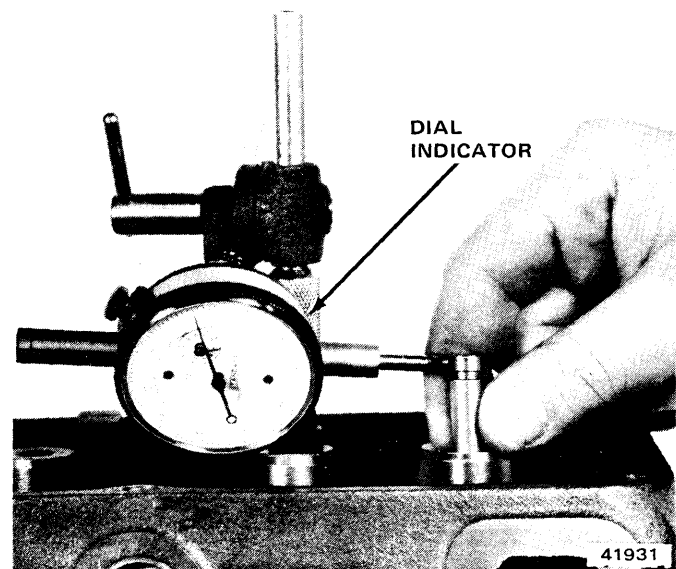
B-15 Valve Stem-to-Guide Clearance Measurement
